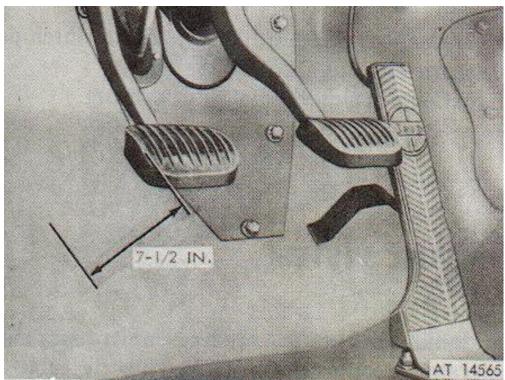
Clutch Pedal To Toe Panel Measurement
